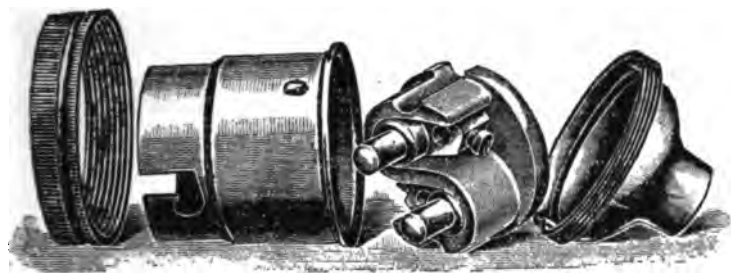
Showing the Different Parts of an Incandescent Lamp-holder. To the Left is the Ring with Female Thread which holds all together. Next to it is the Tube with Bayonet Joint into which the Cap of the Lamp enters. Next to it is the Porcelain Disc with the Plunger Contacts, and on the Right the Piece forming the Back of the Holder through which the Wires enter.
